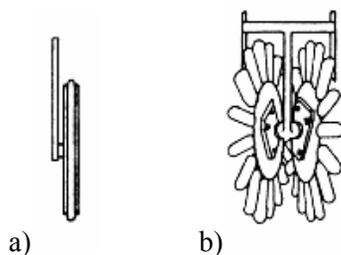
Pressure rollers: a) narrow disk type; b) disk type with fingers.
